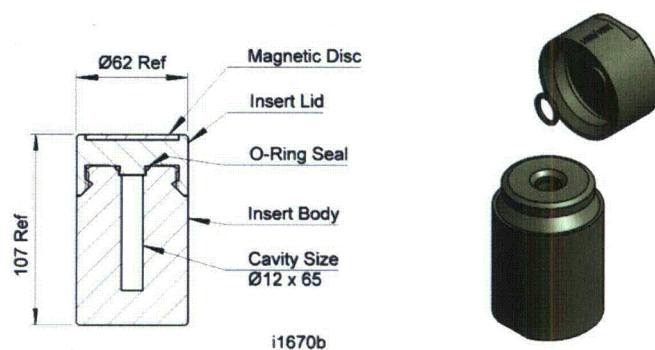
Shielding insert LS-12x65-Tu – Design # 3984
